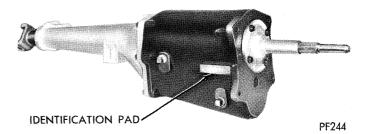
A-230 Transmission—Vehicle Number Pad Location
